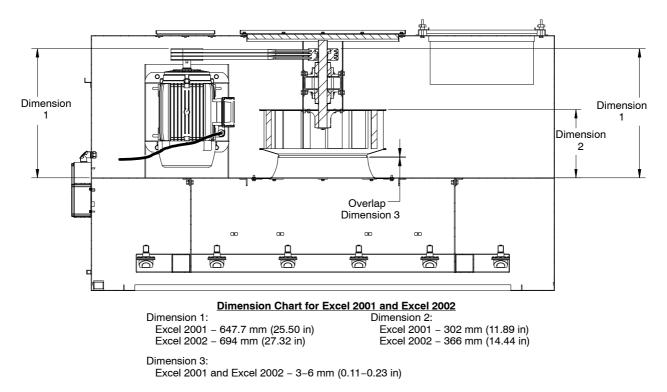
Fan and Motor Sheave and Fan Mounting Dimensions
